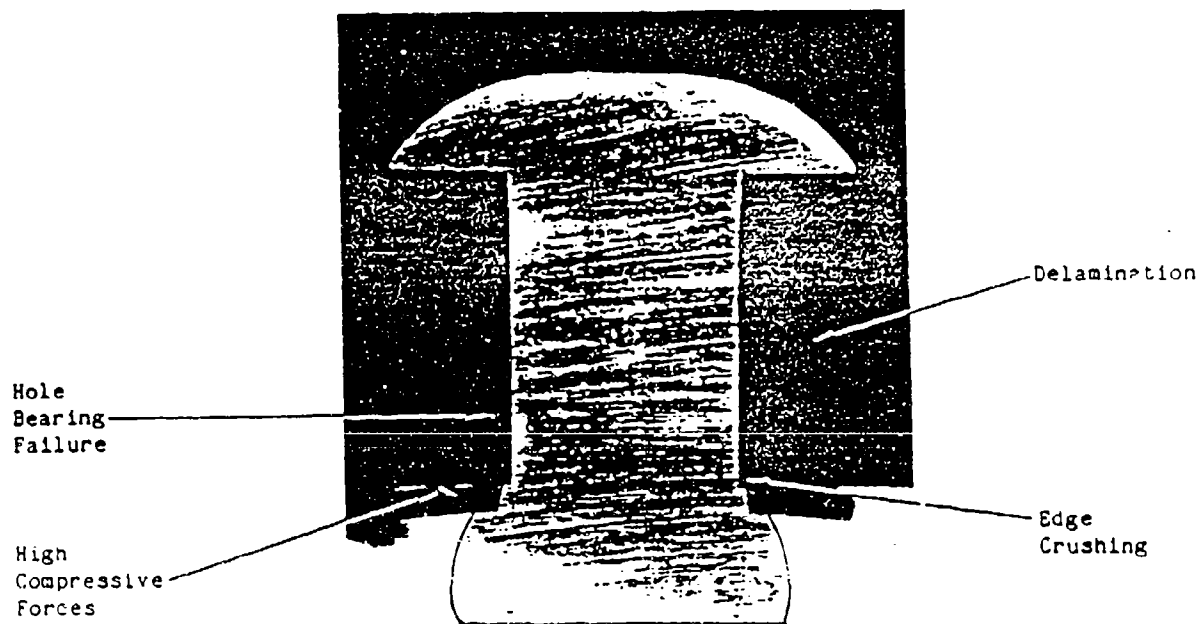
Metal Fastener Installed in Composite Structure Illustrating the Most Common Types of Damage
